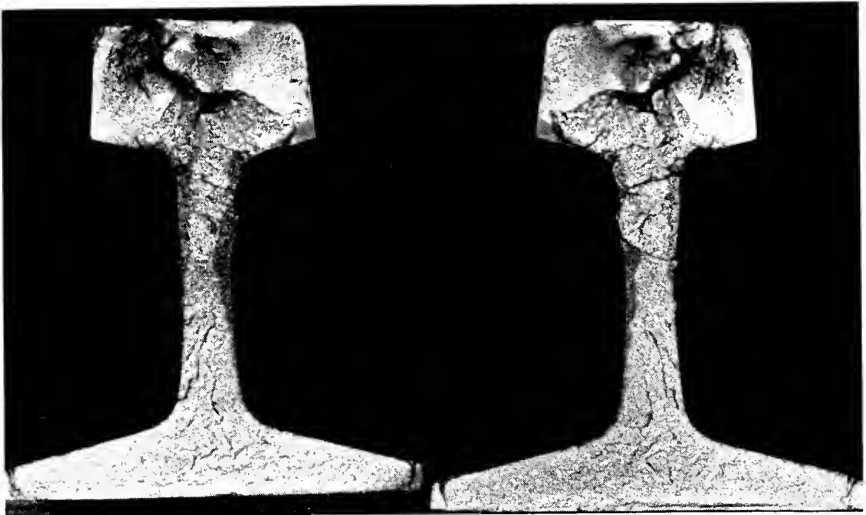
Fractured faces of an oxyacetylene pressure butt welded rail joint, specimen 214E, that failed after being subjected to 897,100 cycles of repeated loading in the 12-in-stroke rolling-load machine under a 40,000-lb wheel load. This failure originated from a fishtail in the head of one rail. Macro-etched transverse sections showing the internal condition of the two rails used to make this joint can be seen in Figs. 3 and 4.
